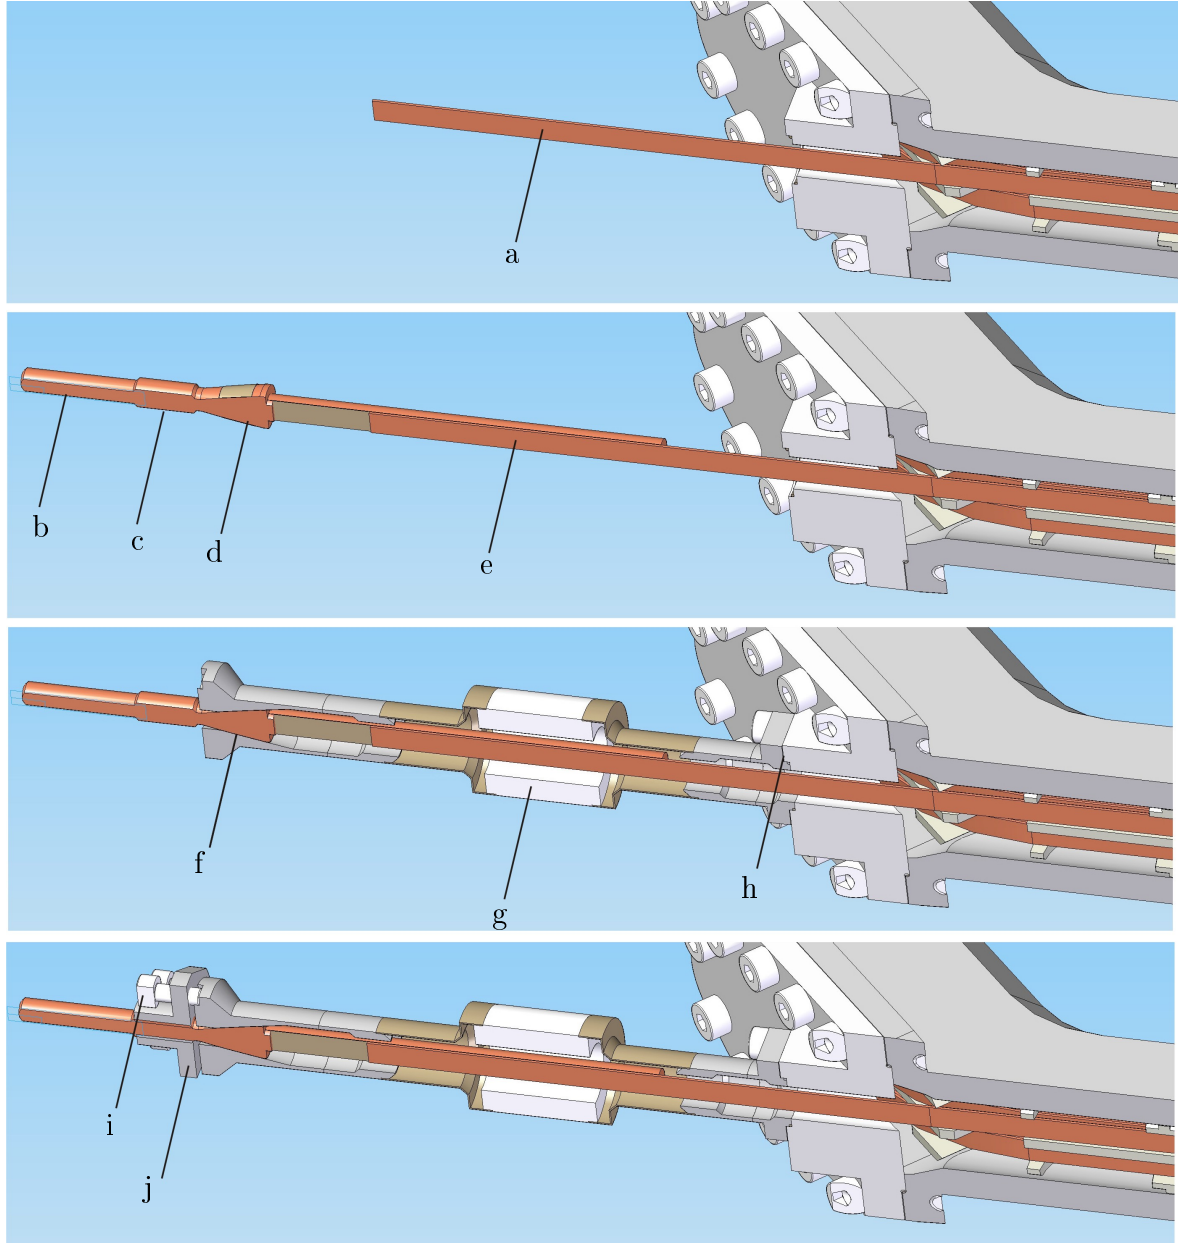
HTS coil current feedthrough, a - end of the HTS wire, b - copper contact surface, c - thread on the copper pin, d - conical sealing surface of the copper pin, e - soldering overlap of the HTS wire and the copper pin, f - conical sealing on the isolator tube, g - ceramic isolator, h - indium wire sealing, i - pressing screw, j - pulling collar on the copper pin.
